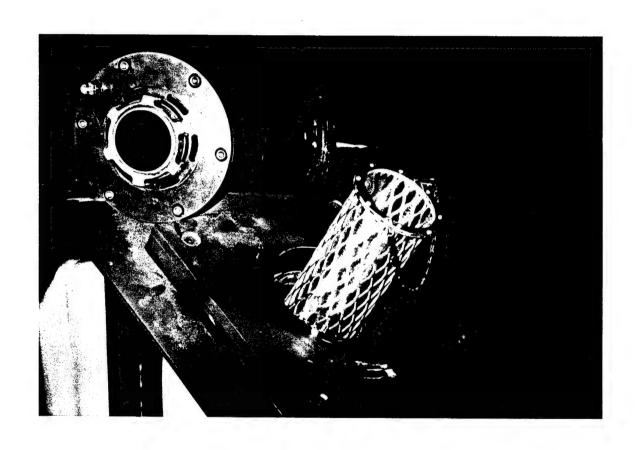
SARS NOZZLE RECEIVER BOLTED ON THE ELBOW ADAPTER AND STRAINER REMOVED
